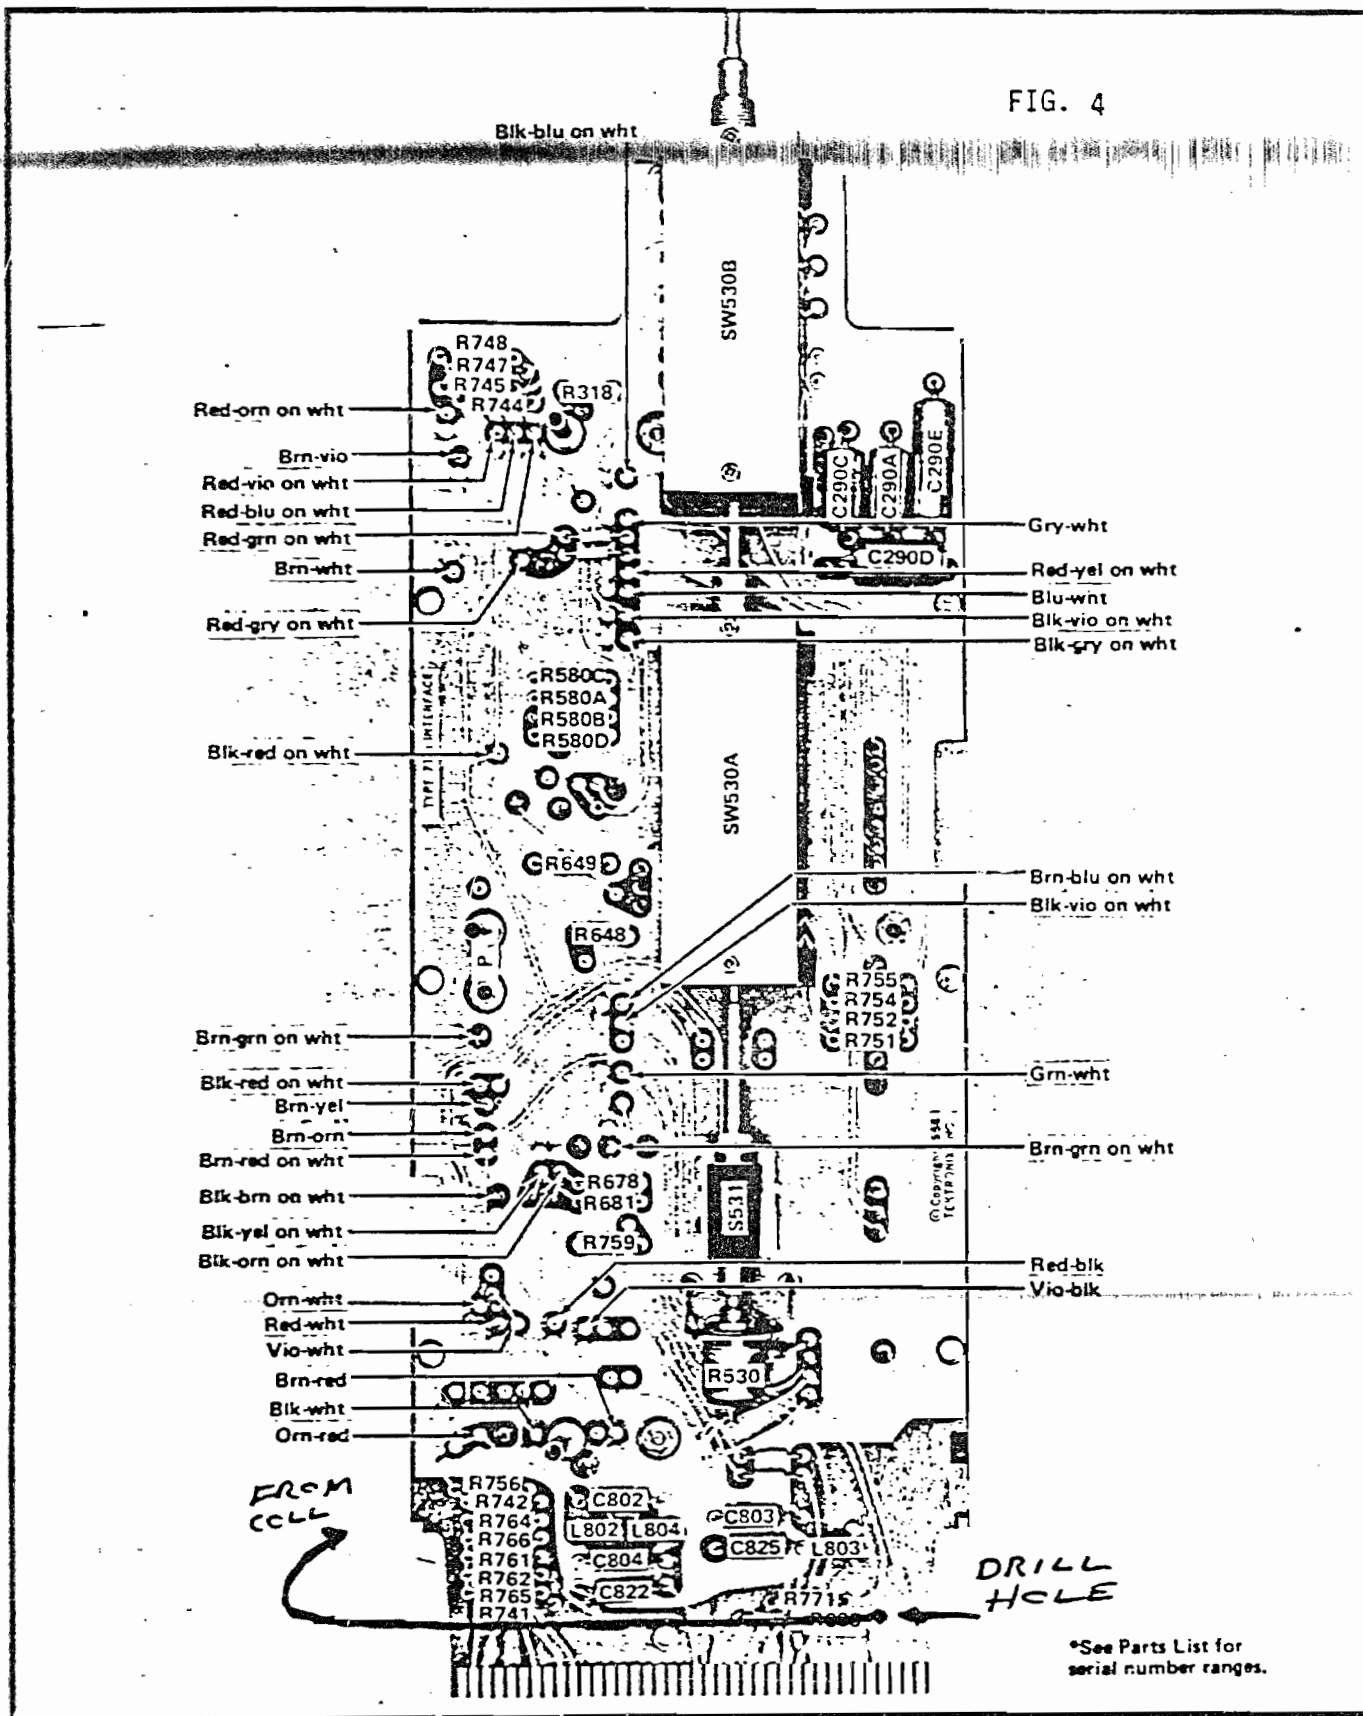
Interface Board (left side) showing location of components and wire color-coding.
